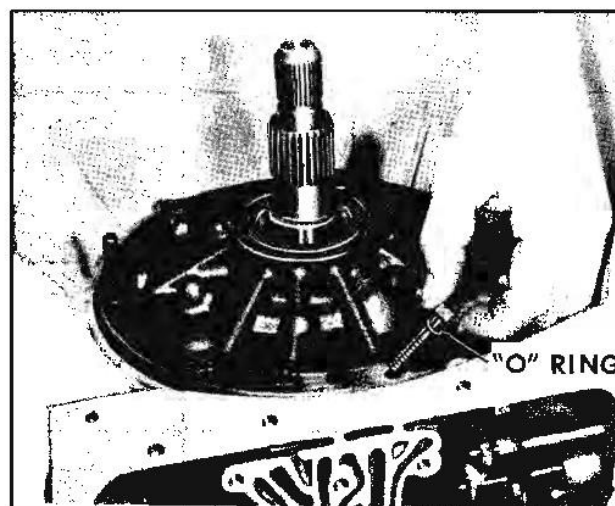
B-136 Installing Oil Pump Retaining Bolts
